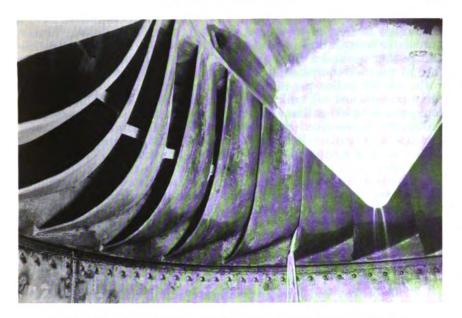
Struts welded to Norris turbine runner to eliminate vibration.
